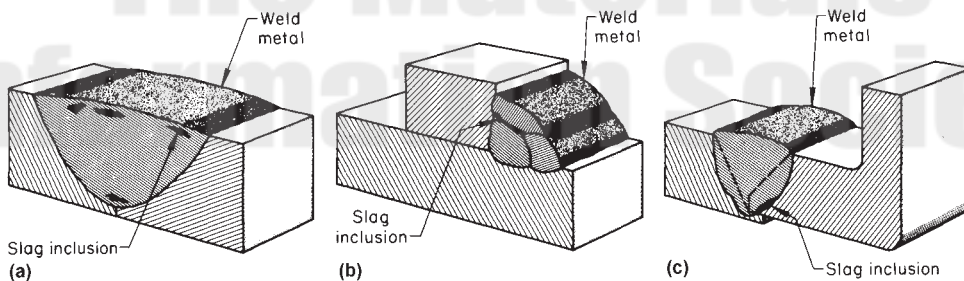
Sections showing locations of slag inclusions in weld metal. (a) Near the surface and in the root of a single-pass weld. (b) Between weld beads in a multiple-pass weld. (c) At the side of a weld near the root. Source: Ref 1
